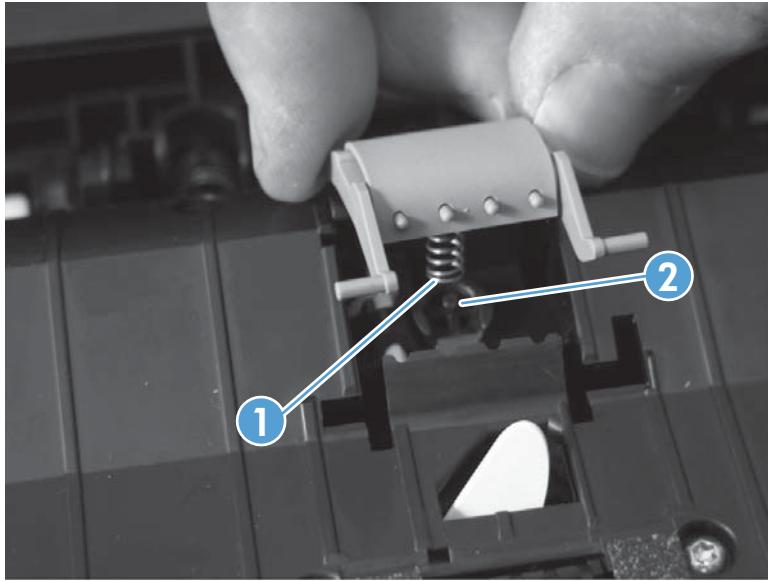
Remove the ADF separation pad assembly (3 of 3)
